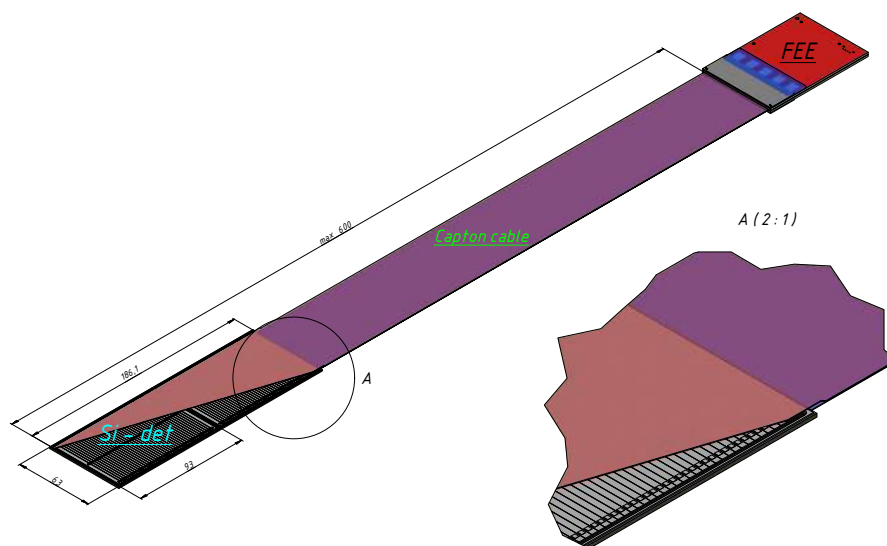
Concept of the barrel DSSD module. All dimensions are in millimeters.
